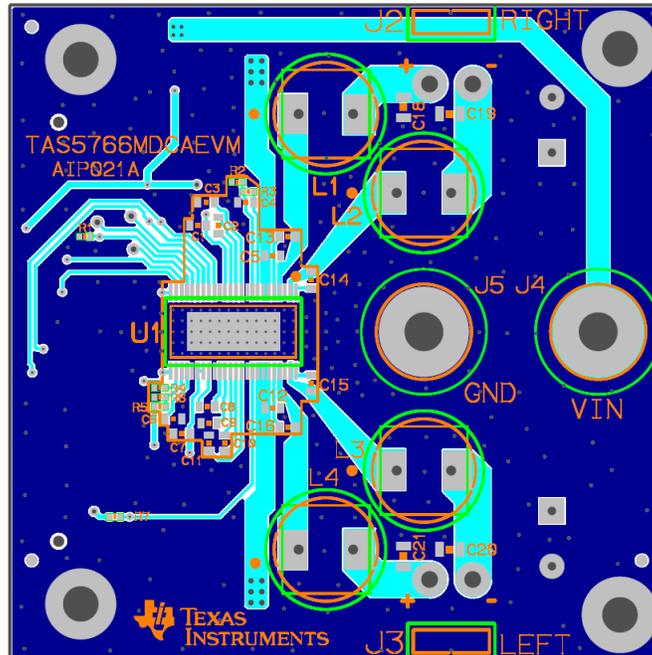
TAS5766MDCAEVM Top Composite Assembly
